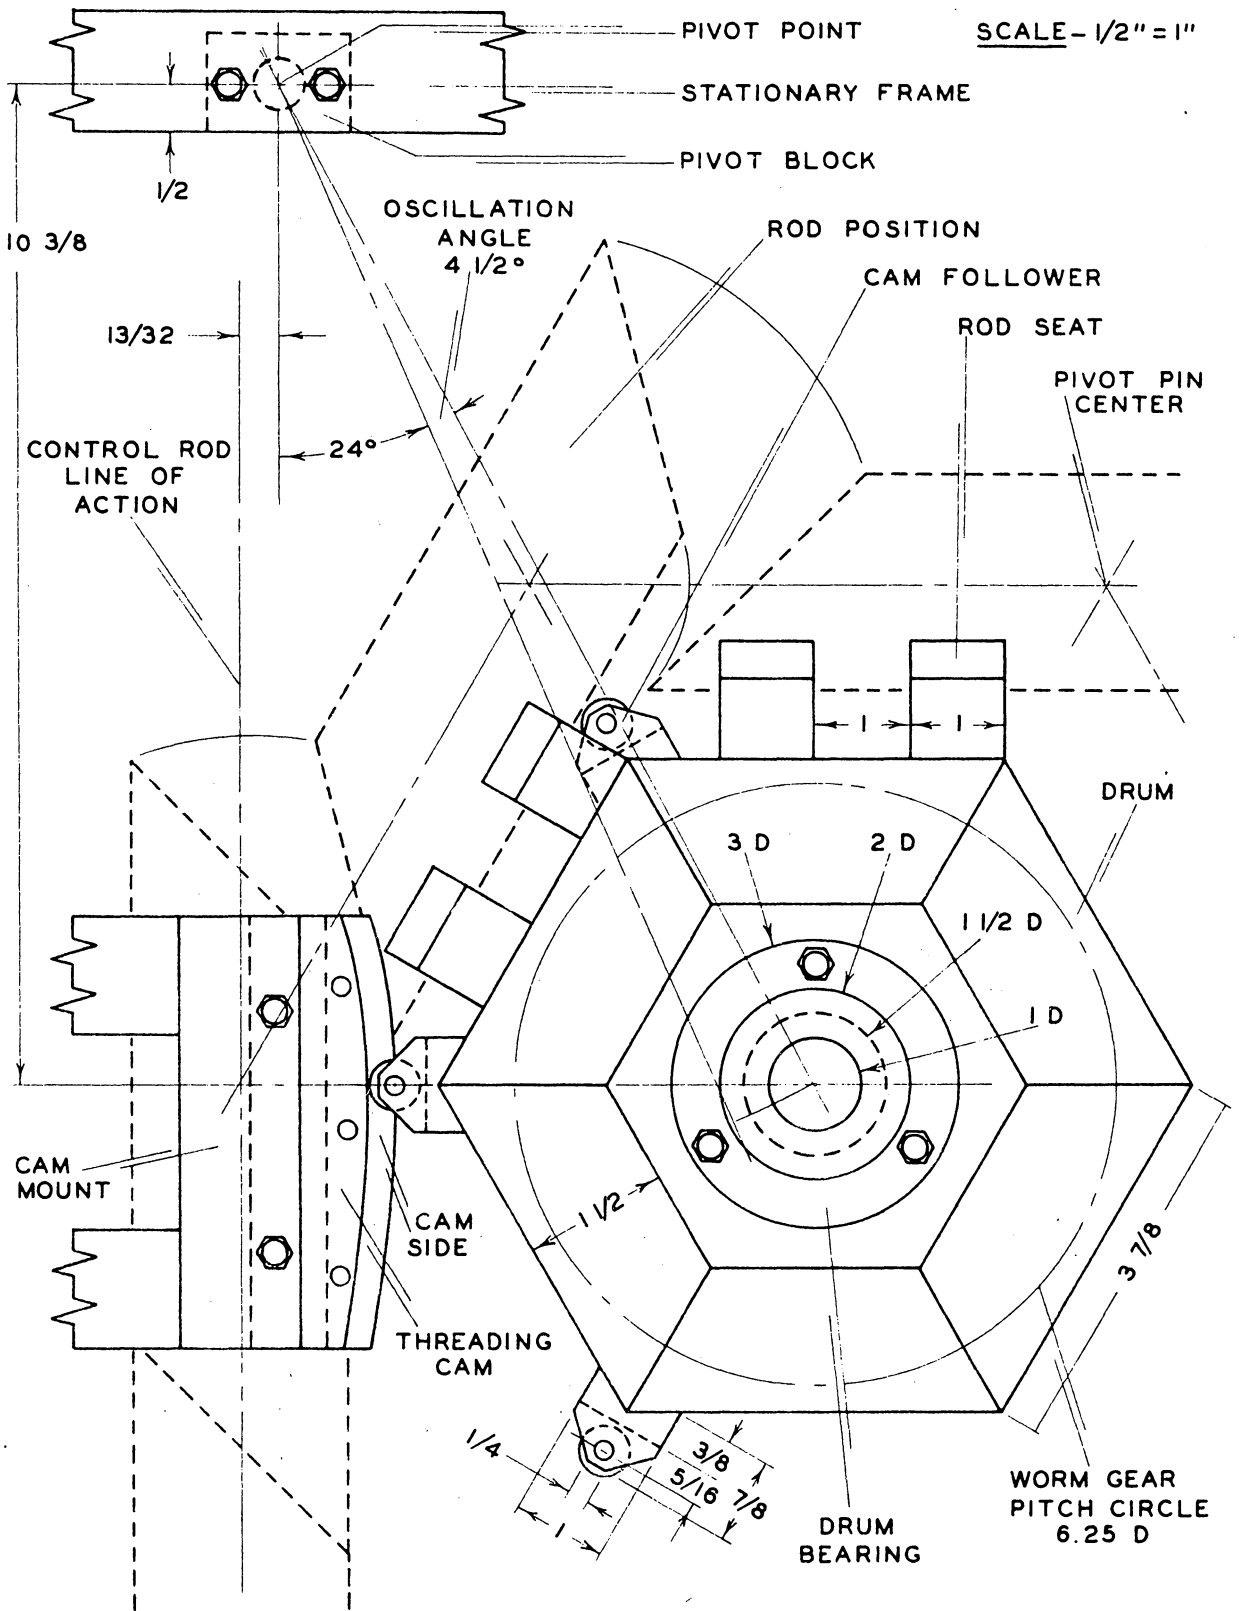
END VIEW OF CONTROL ROD DRUM AND THREADING CAM
